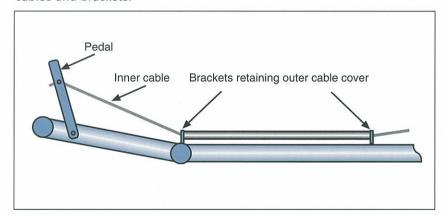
This is typical of the mounting brackets you will require to fit the control cables. The hole in the bracket should be large enough to let the inner cable pass through easily but smaller than the diameter of the cable sheath.
